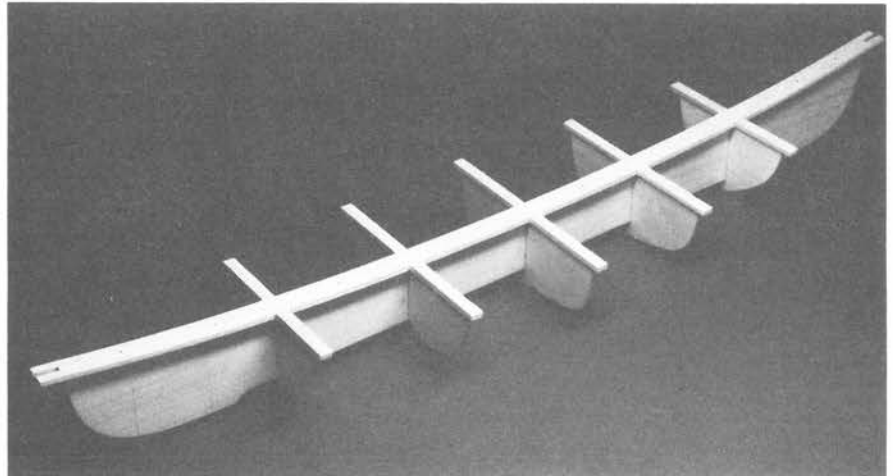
The hull mold (profile and section molds) assembled and glued.
